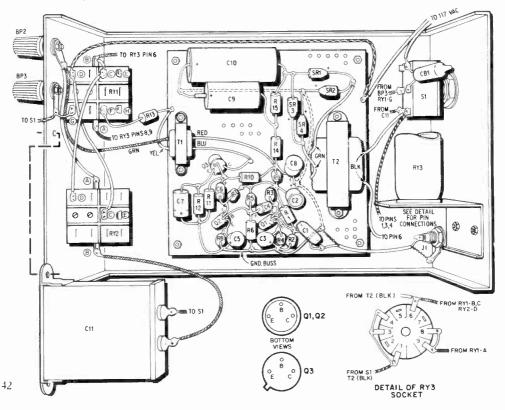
Start construction by mounting all the cabinet components. L-bracket at the lower right supports 9-pin tube socket for delay relay RY3.
